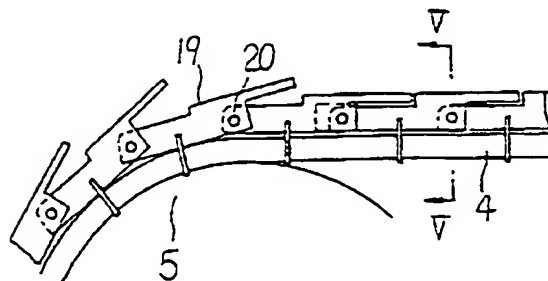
is a side view, partly in longitudinal cross section, showing an embodiment of the apparatus for caring for the inside of a gun barrel according to the present device; Fig. 2 is an enlarged front view in cross section of the part of an oil hydraulic motor; Fig. 3 is a side view in longitudinal cross section of that part; Fig. 4 is a side view showing support fittings of a cleaning hose; Fig. 5 is a front view in cross section taken along the line V-V of Fig. 4; and Fig. 6 is an illustrative view showing the
